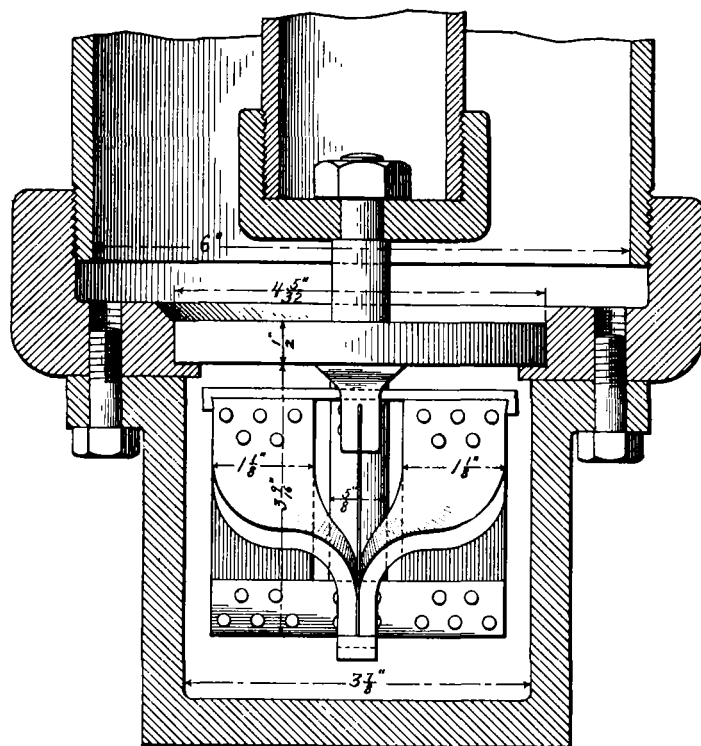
Universal pivot, or gimbal, of ribbon-steel construction, Marvin system.
